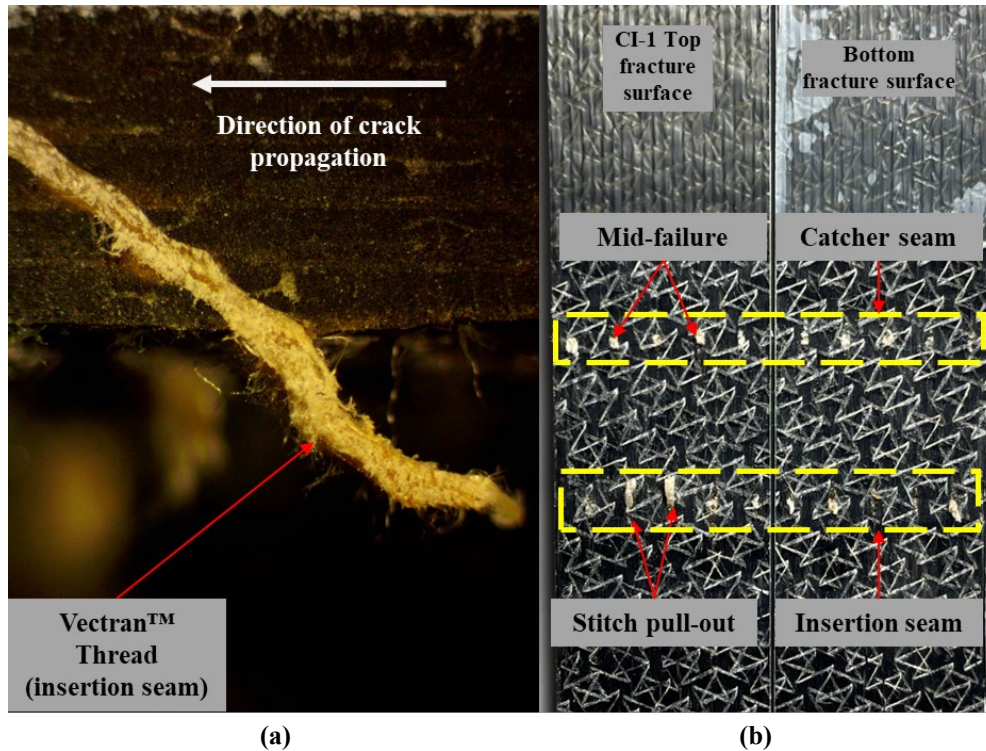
(a) Stitch failure due to pull-out in specimen CI-1 and (b) stitch failure in top and bottom fracture surface of specimen CI-1.
